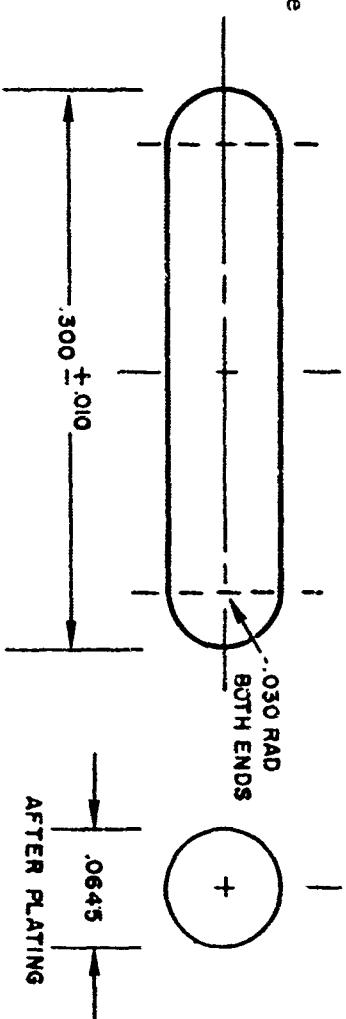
Drawing P-1006, Aluminum-Oxide Coated Aluminum Electrode (0.0625-in.-dia, 99% 2SO Temper Aluminum).
